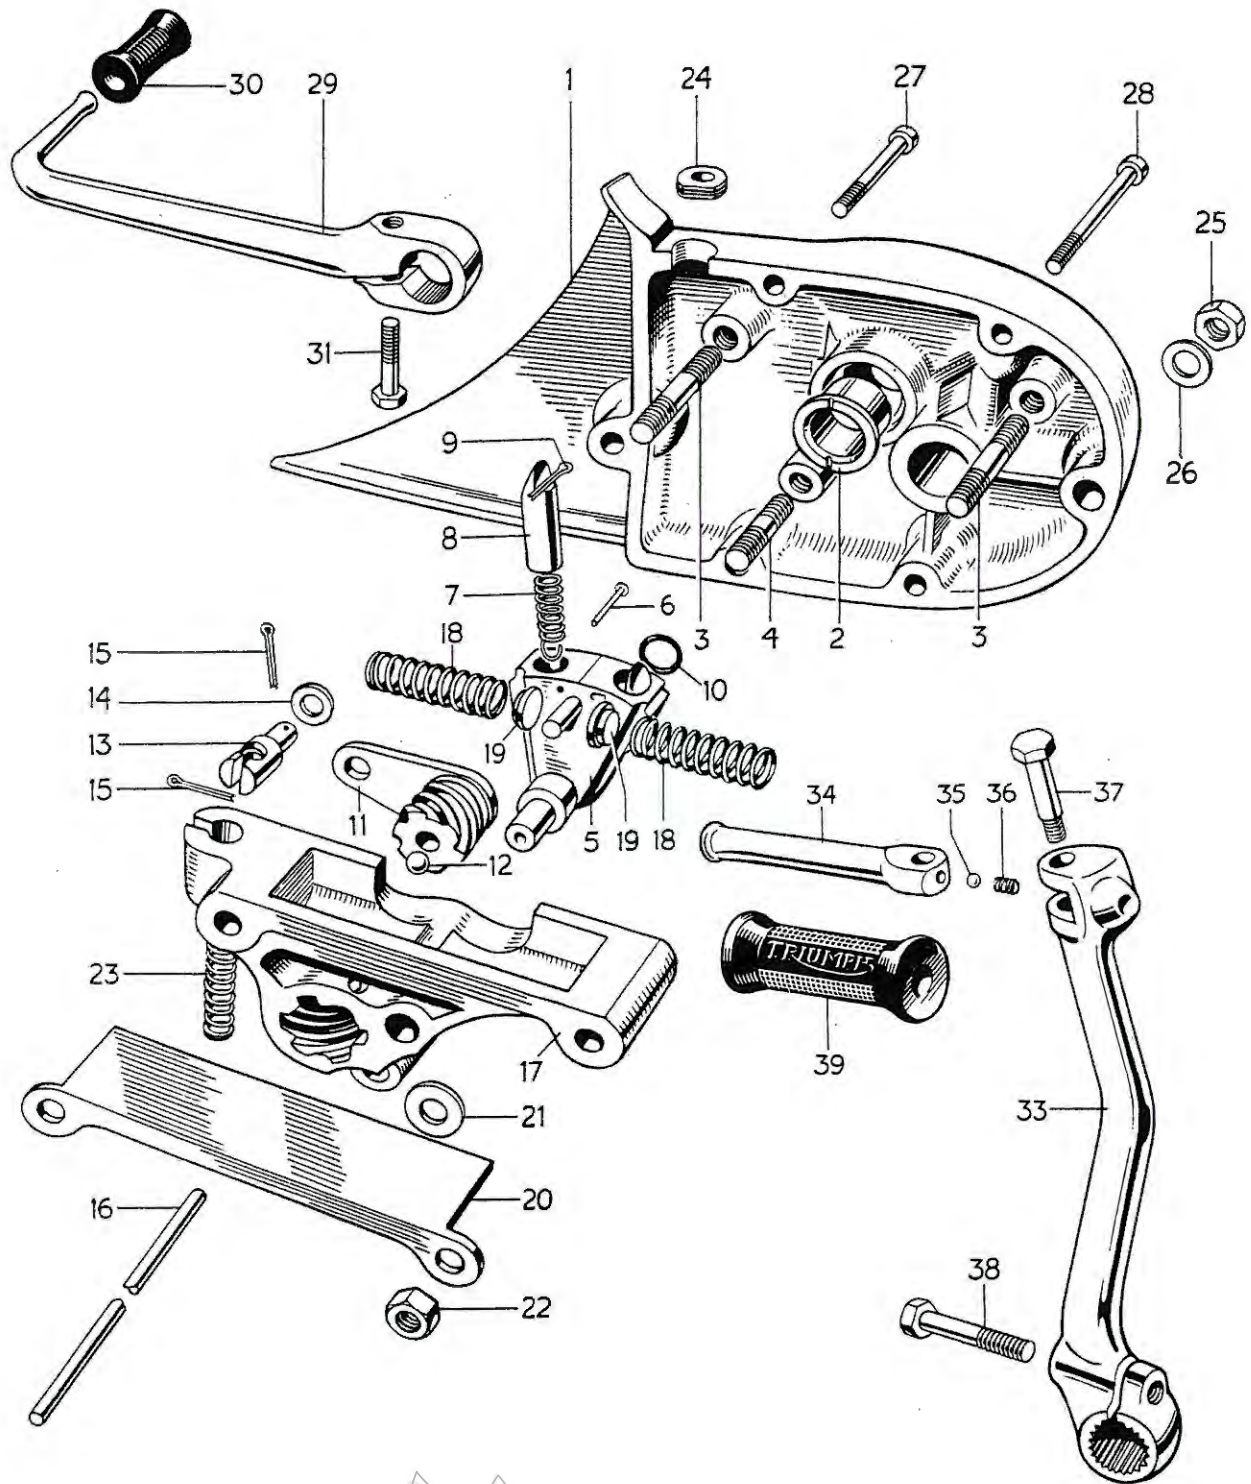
GEARBOX OUTER COVER AND LEVERS.
